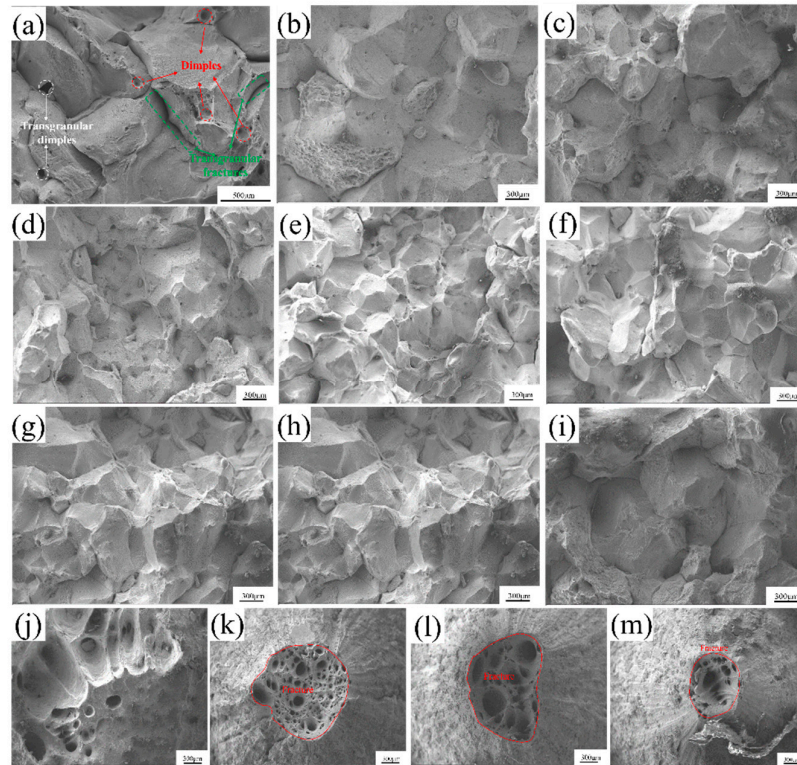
Fracture morphologies of the specimen after hot tensile testing at different temperatures: (a) 600 °C; (b) 650 °C; (c) 700 °C; (d) 750 °C; (e) 800 °C; (f) 850 °C; (g) 900 °C; (h) 950 °C; (i) 1000 °C; (j) 1050 °C; (k) 1100 °C; (l) 1050 °C; (m) 1200 °C.
